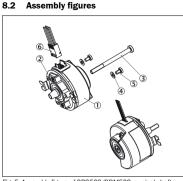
Assembly figure of SRS50S/SRM50S, conical shaft, spring plate
